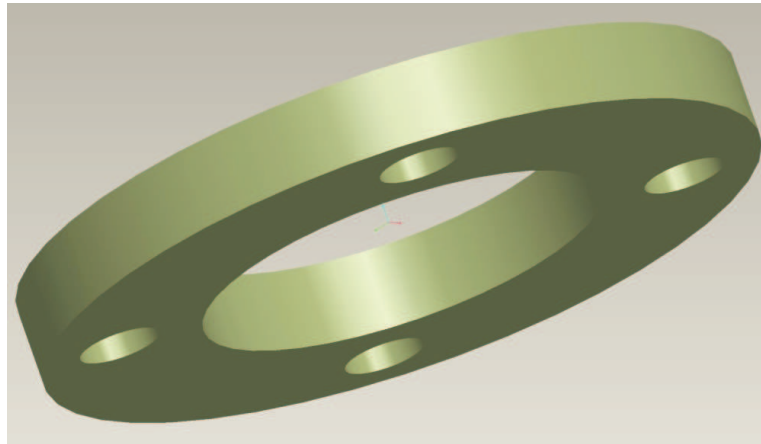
The middle layer contains a center hole that matches the dimensions of the valve body.
